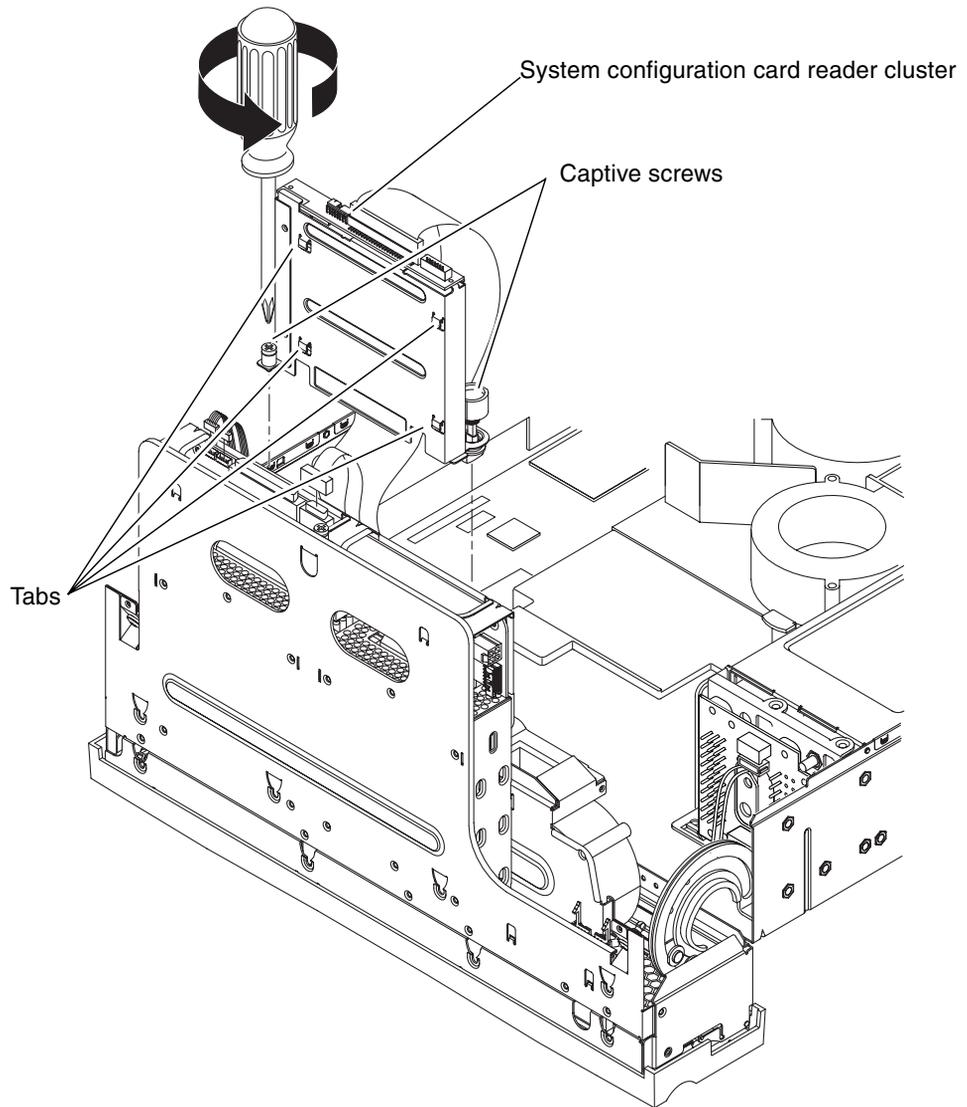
Removing the System Configuration Card Reader Cluster
